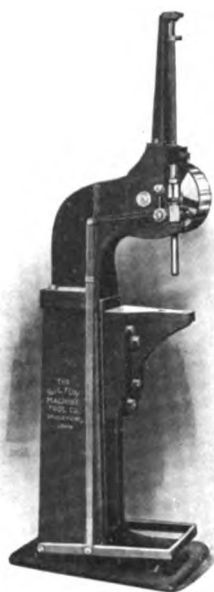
$\frac{3}{8}$ -Inch Rotary Blow Riveting Machine
